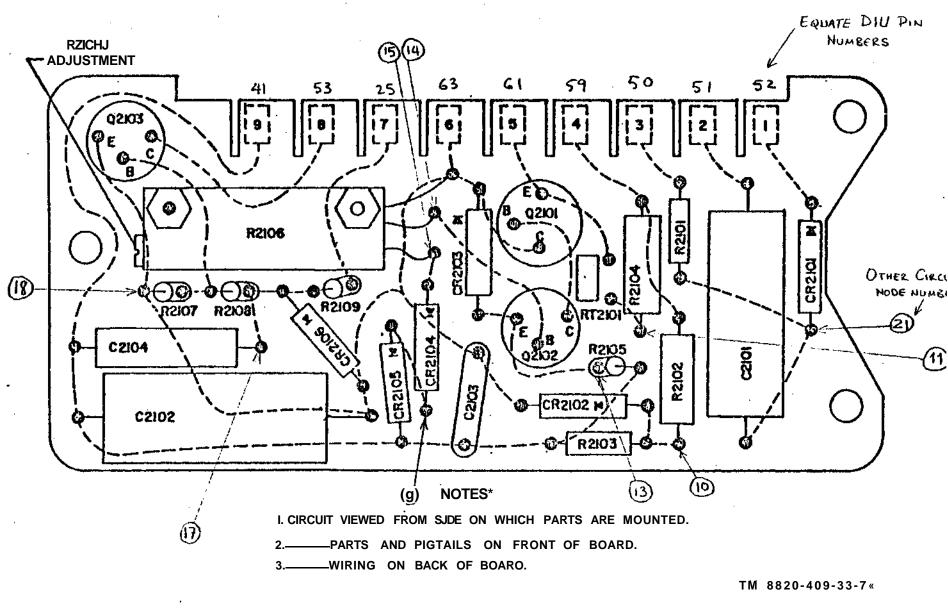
</sup> Assembly A2100, Parts Location and Wiring Diagram.
